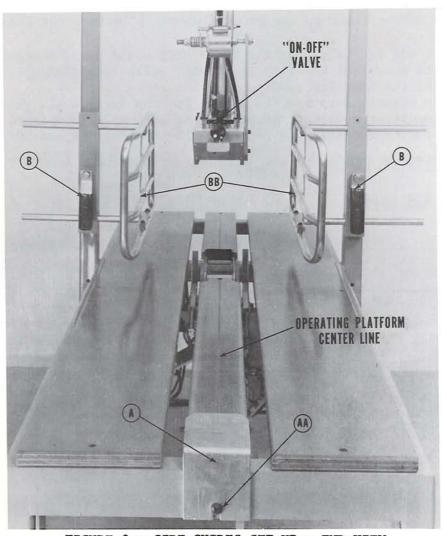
SIDE GUIDES SET-UP - END VIEW
